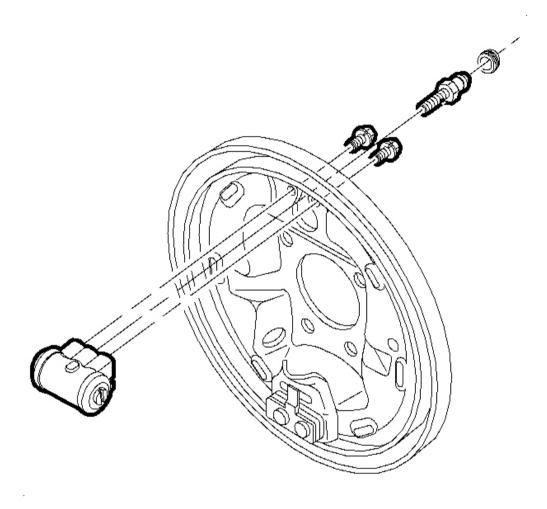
Removing/Installing Wheel Cylinder Courtesy of GENERAL MOTORS CORP.
